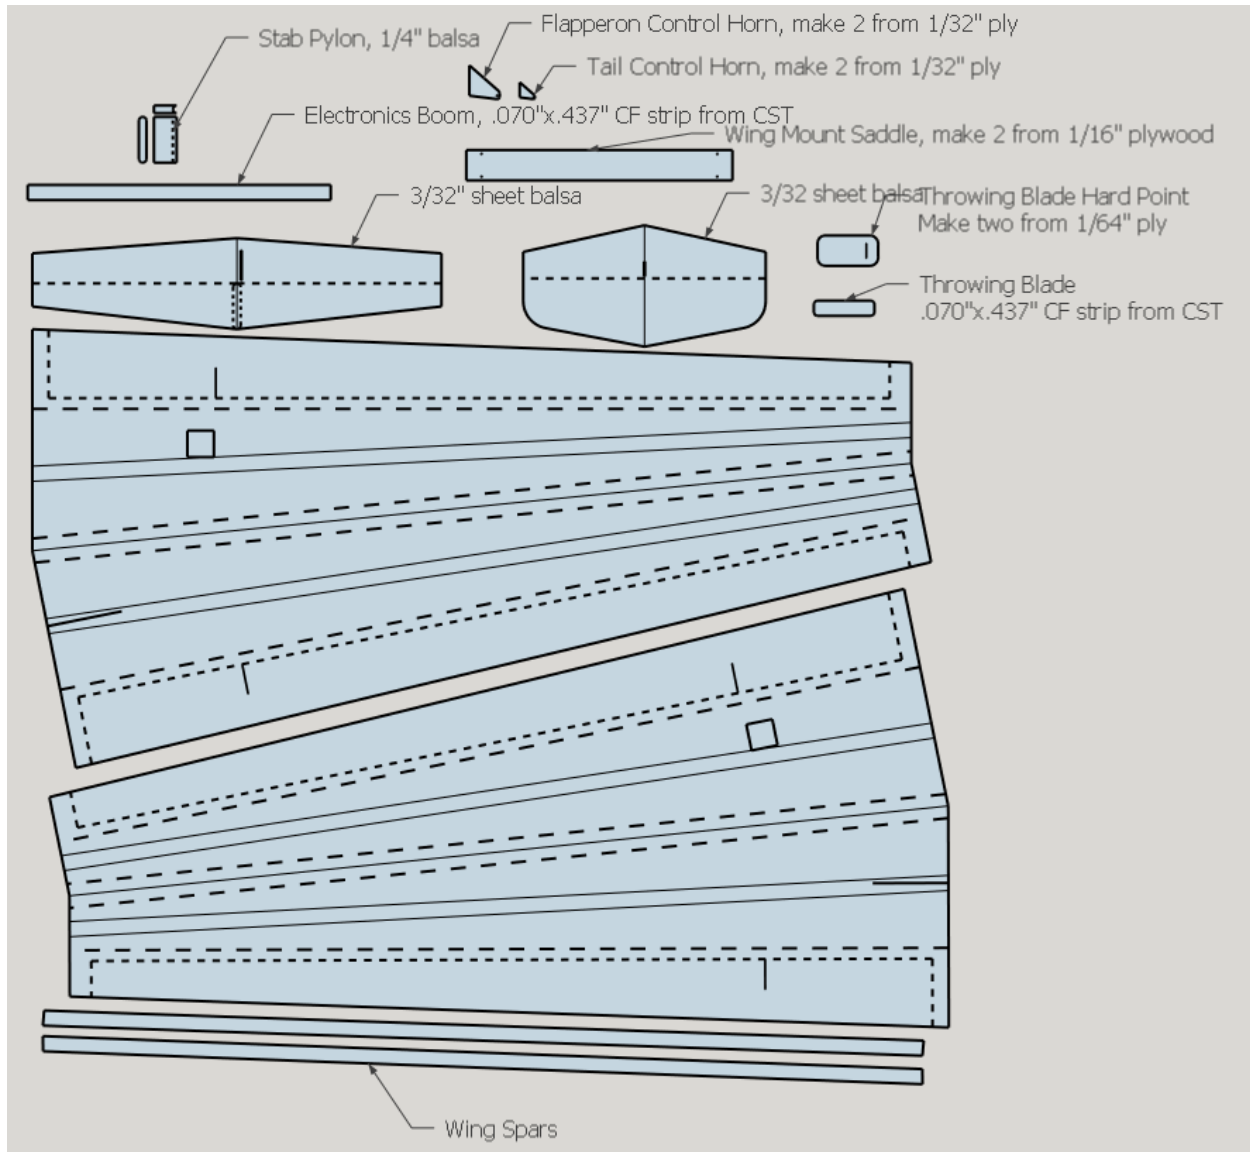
Plans layout; except as noted, all parts are Adams foamboard
